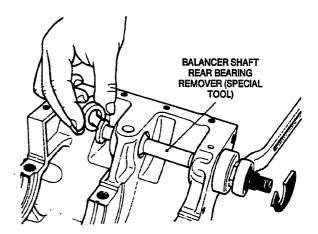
REMOVING BALANCE SHAFT REAR BEARING
